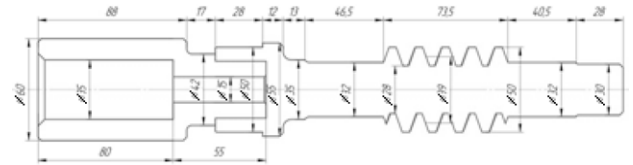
The sizes of an incorporated body the worm-shaft (the cylindrical shaft and the worm-shaft)
